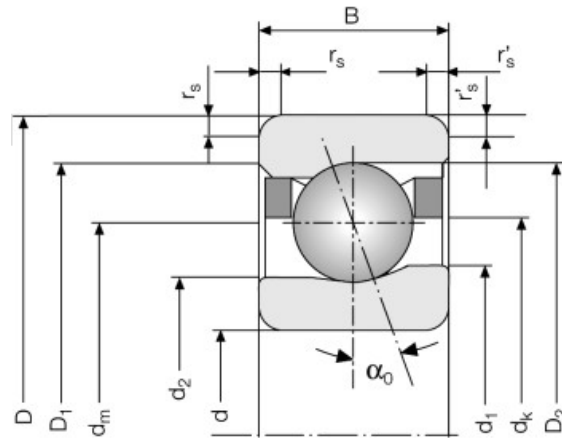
Spindle ball bearing, Source: GMN bearings [21]
